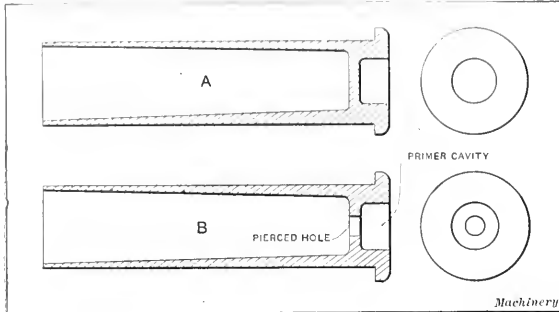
Cross-sectional Views of Shell before and after piercing Primer Hole
